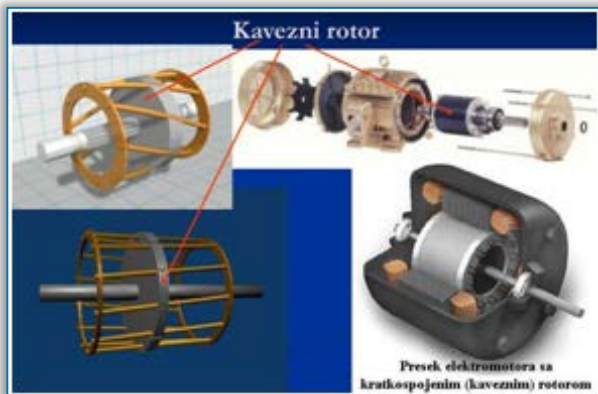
Squirrel-cage rotor and several parts of the rotor motors [15]
